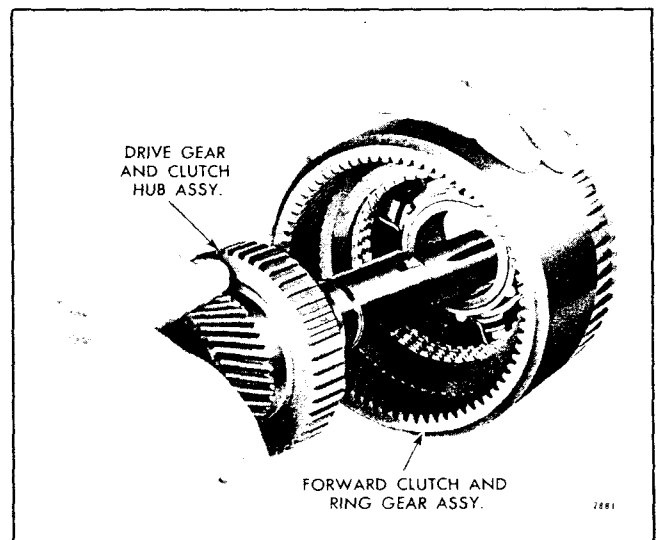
Installing Drive Gear and Forward Clutch Hub Assembly into Forward Clutch and Ring Gear Assembly
